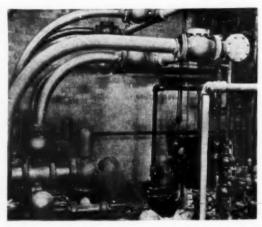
A typical installation of silver alloy brazed piping and fittings in a steam plant.
